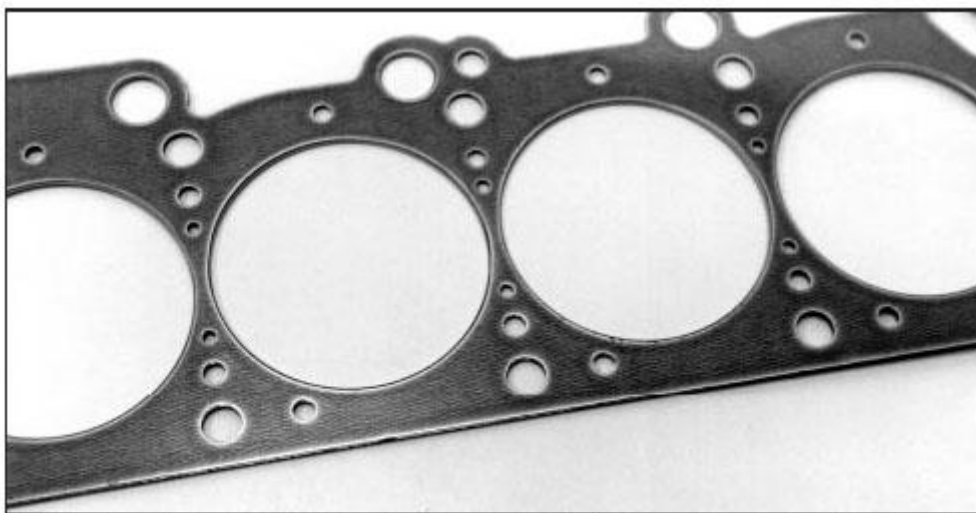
This gasket is pre-coated with a pressure sensitive sealer. Use of additional sealers will interfere with the gaskets ability to provide a secure seal.
